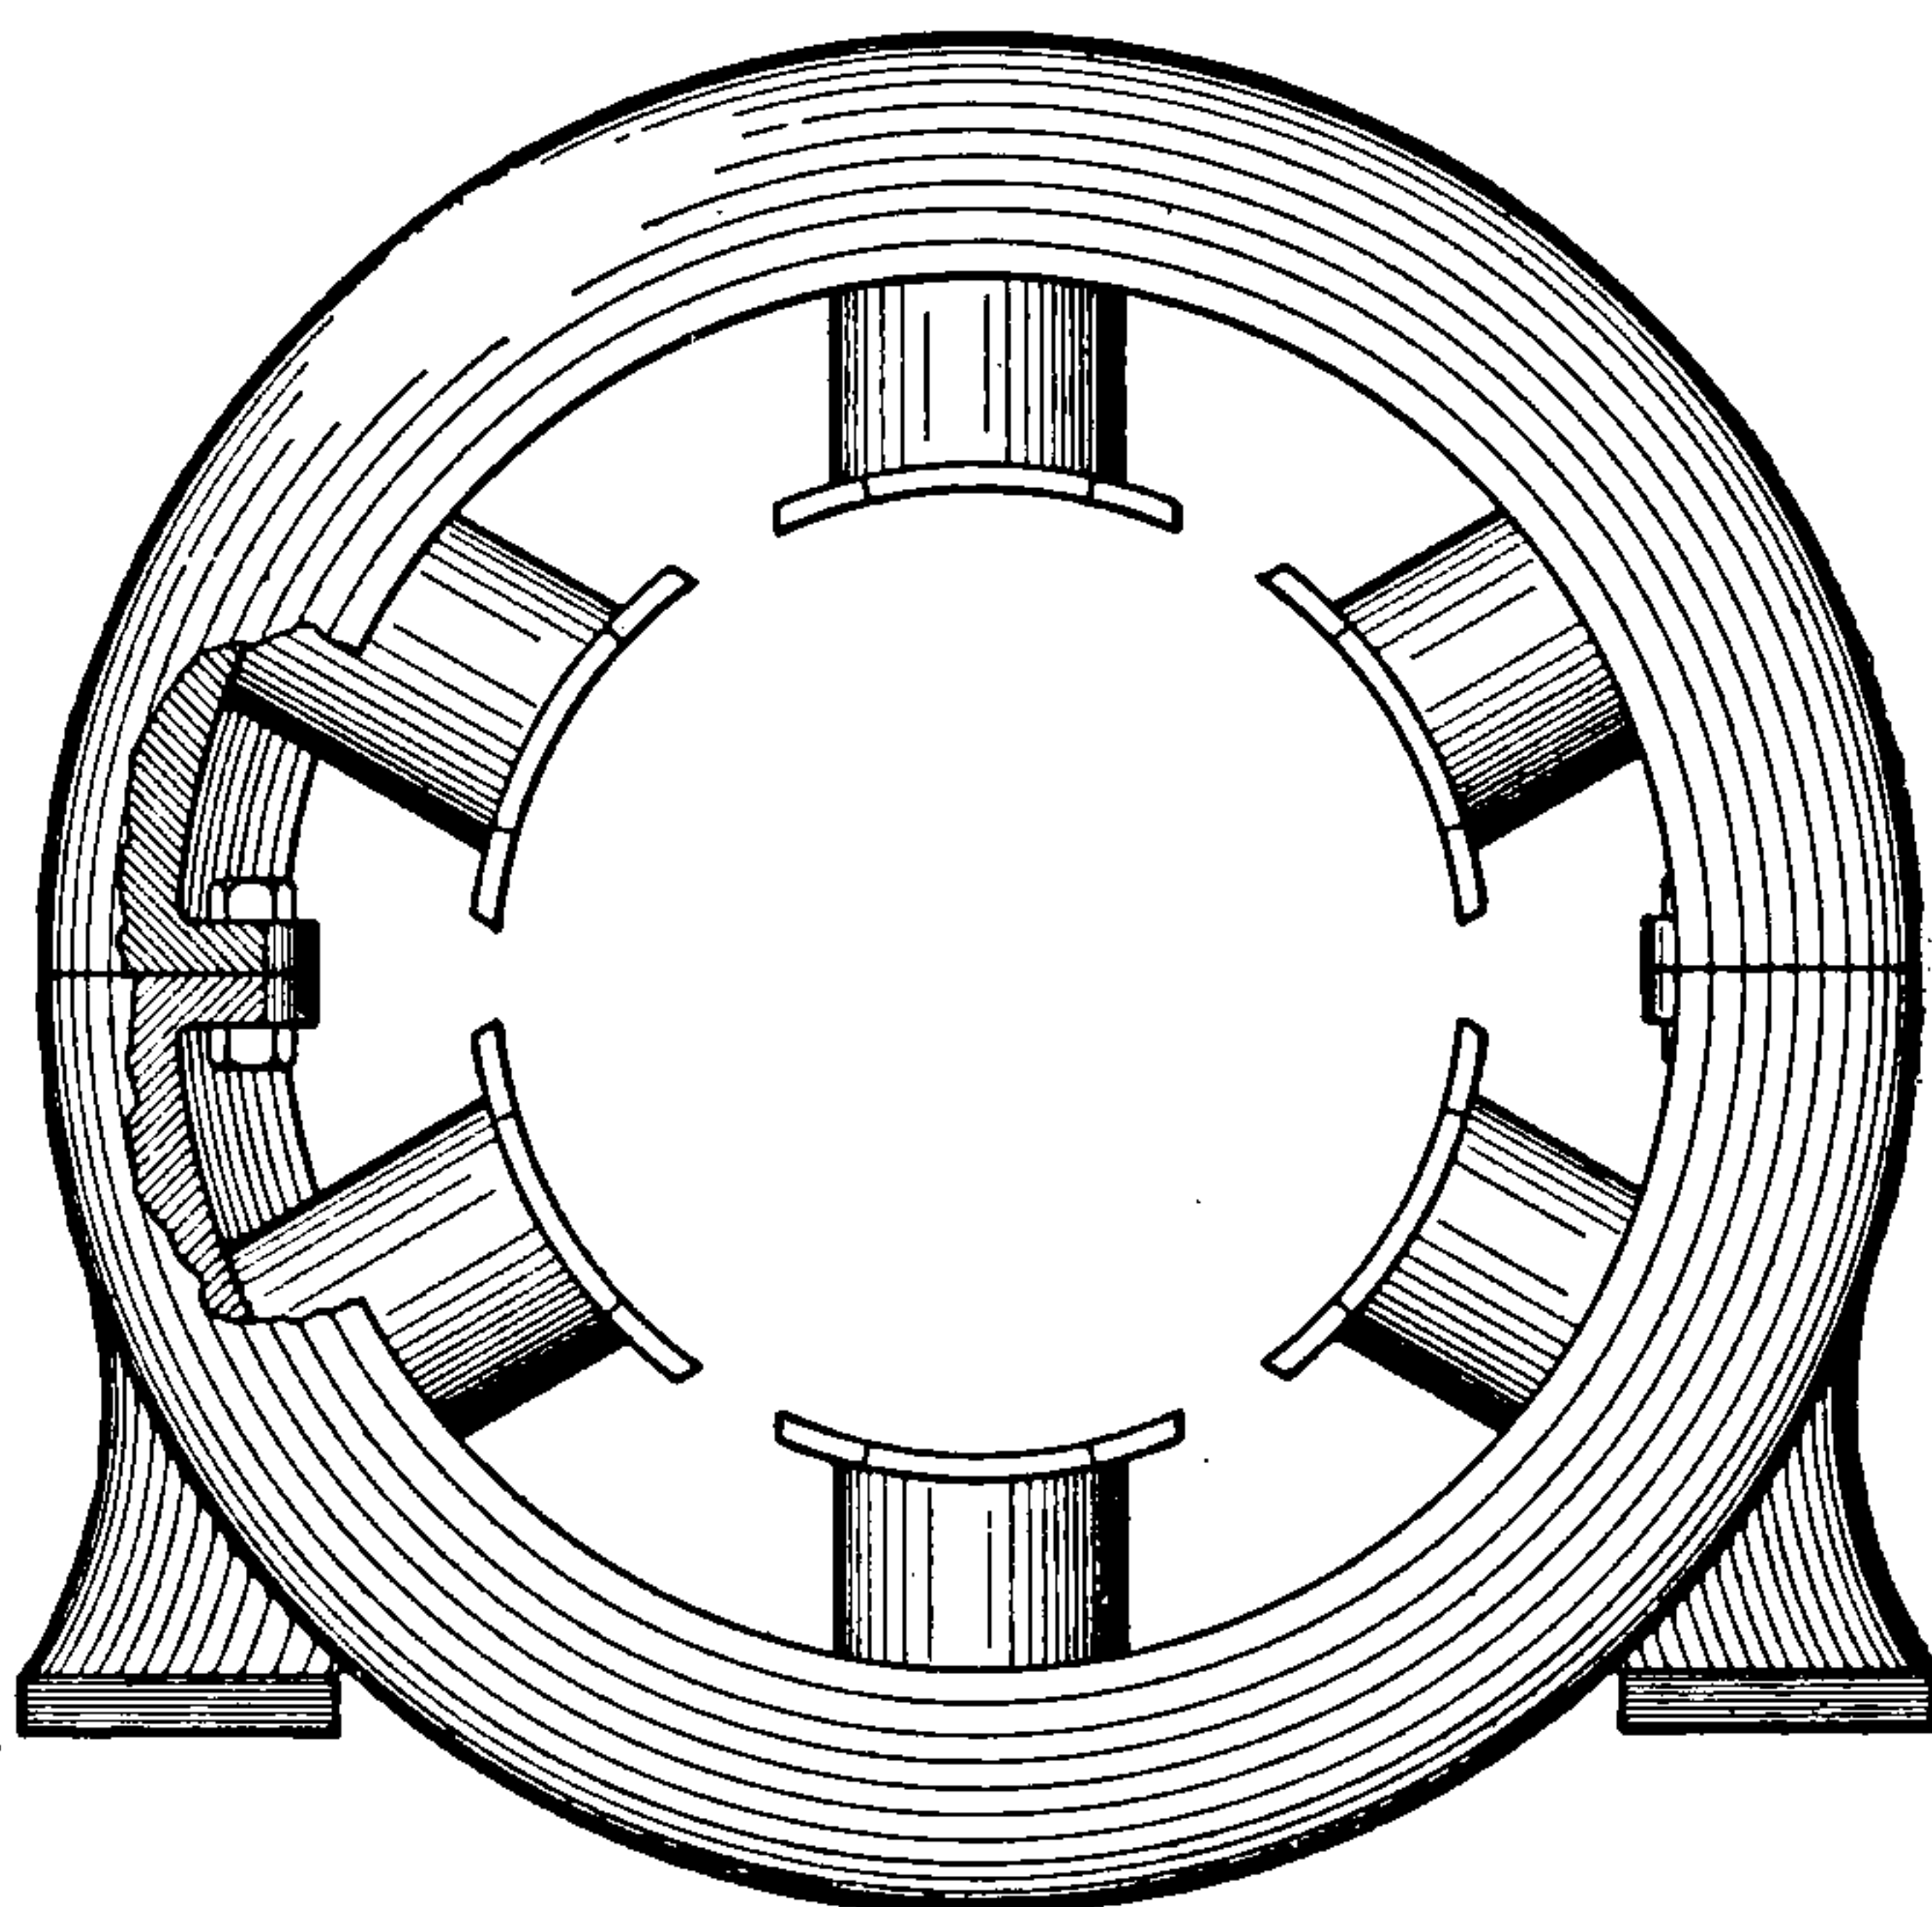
Magnet-Yoke with Parts Bolted Together on Inside Ring
